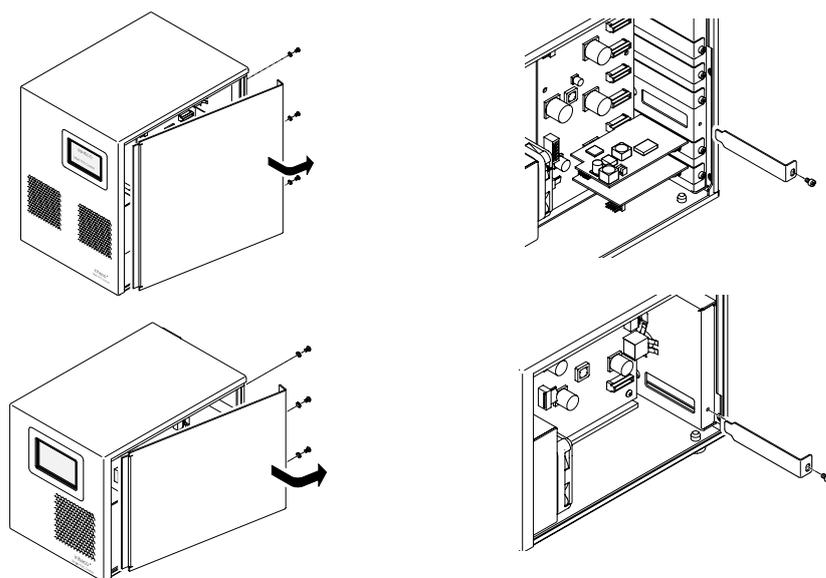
Removing cover plate (MTC shown at top and STC shown below)
